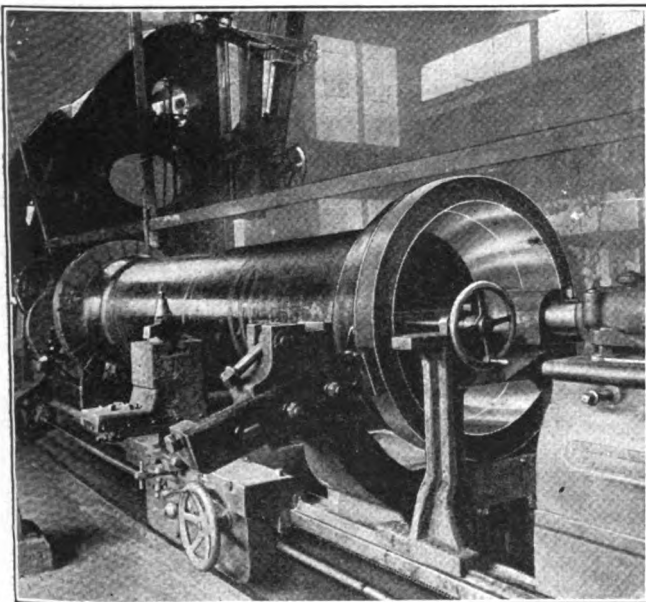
MACHINING THE INSIDE LEAD RING OF THE BELL END OF A 30-INCH PIPE
